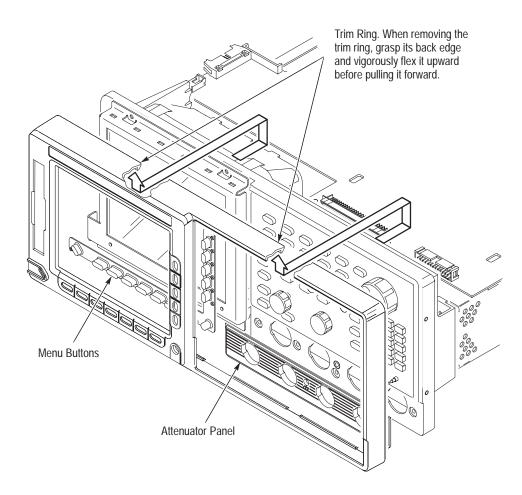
Front cover, trim ring, menu buttons, and attenuator panel removal (front cover not shown)
